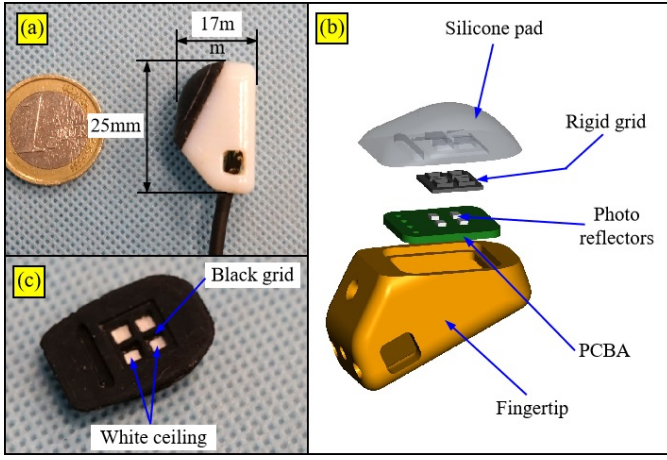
PRISMA hand II fingertip assembly: fingertip dimensions (a), assembly of a tactile/force sensor (b) and silicone pad features (c).
